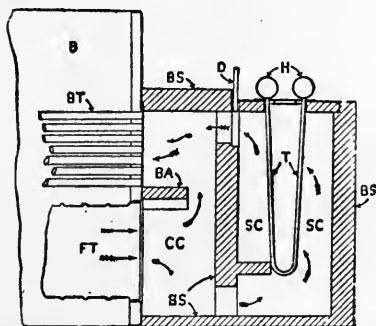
PROF. WATKINSON'S SUPERHEATER FOR DRYBACK LAND BOILERS.
